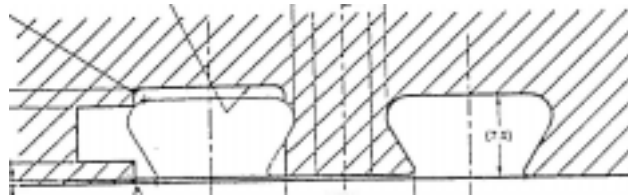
Schematic illustrating modification of GNS-12 primary lid seal groove. Note square cut inside groove to hold seal retainer clips.
